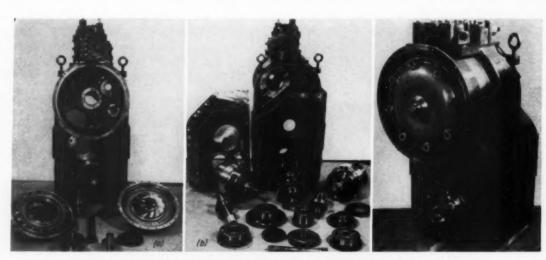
A transmision unit employing gears in conjunction with a hydraulic torque converter showing the converter end with converter parts exposed, a; the gear end with transmission gearing and clutch assemblies exposed, b; and a completely assembled unit, c
